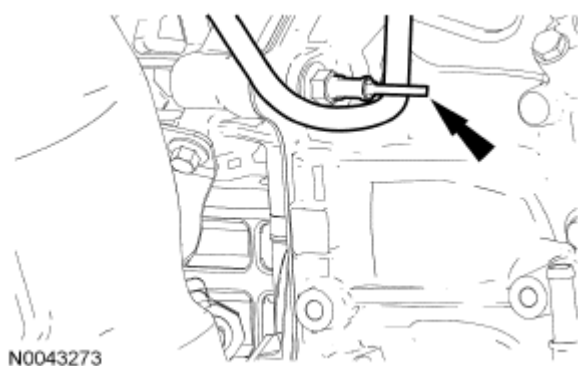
Locating Wiring Harness Retainer Stud Bolt
